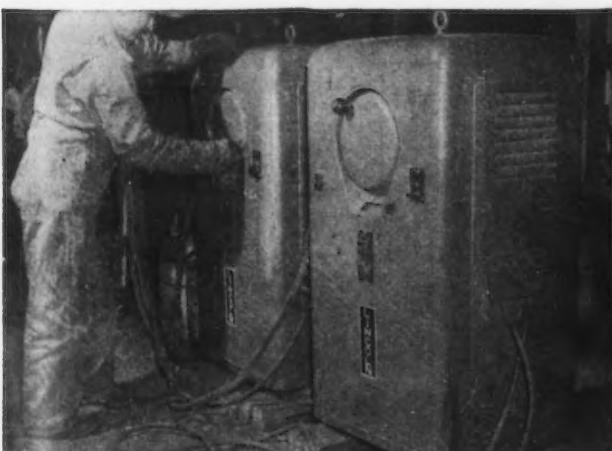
Setting correct welding current with Continuous Current Control on the 500-amp. Lincoln "Fleetwelder" AC arc welder. "Fleetwelder" has exclusive "Arc Booster" that makes arc striking easy on all types of work.
